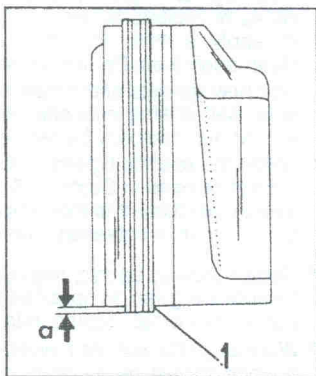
The side seals (1) for the front and rear main bearing caps must be proud on each side (a) by the dimension given in the text.
